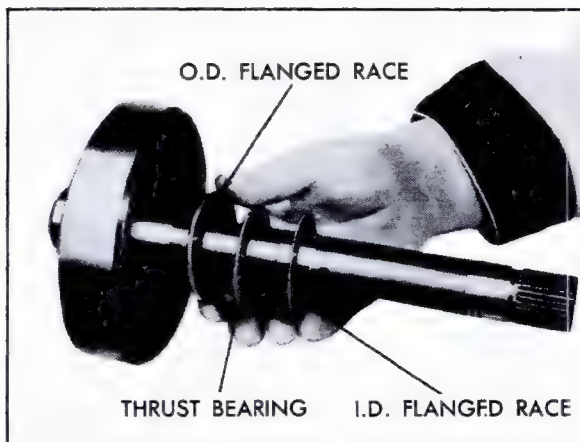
Installing Races and Thrust Bearing on Inner Face of Rear Internal Gear
